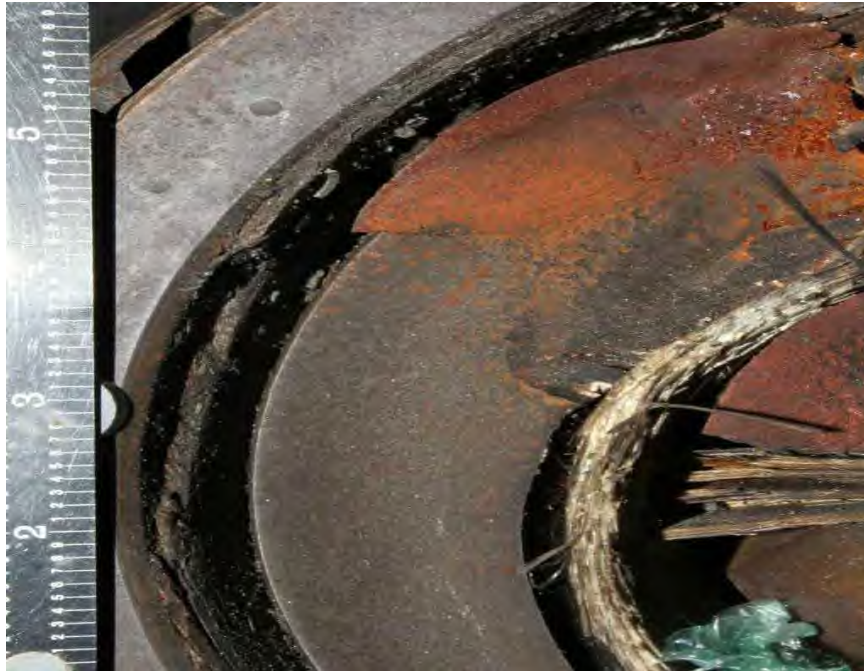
Close-up photograph of fracture surface of generator shaft aft end fracture half.
